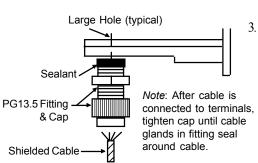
Inserting Shielded Interconnect Cable through PG13.5 Fitting and Cap
